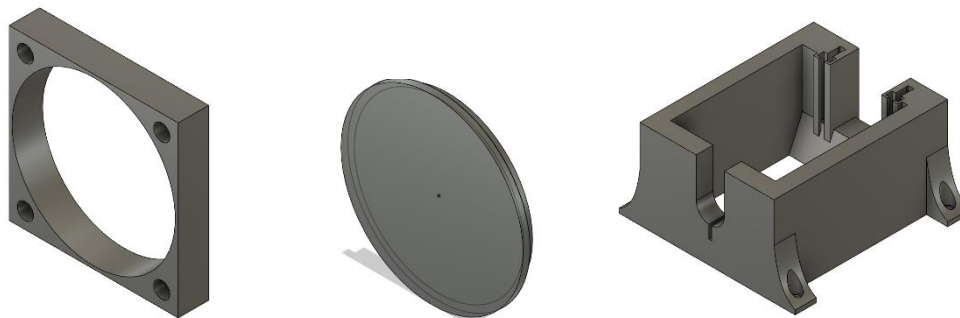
, Grouphead Holder, Grouphead Cover, Pump Holder.
